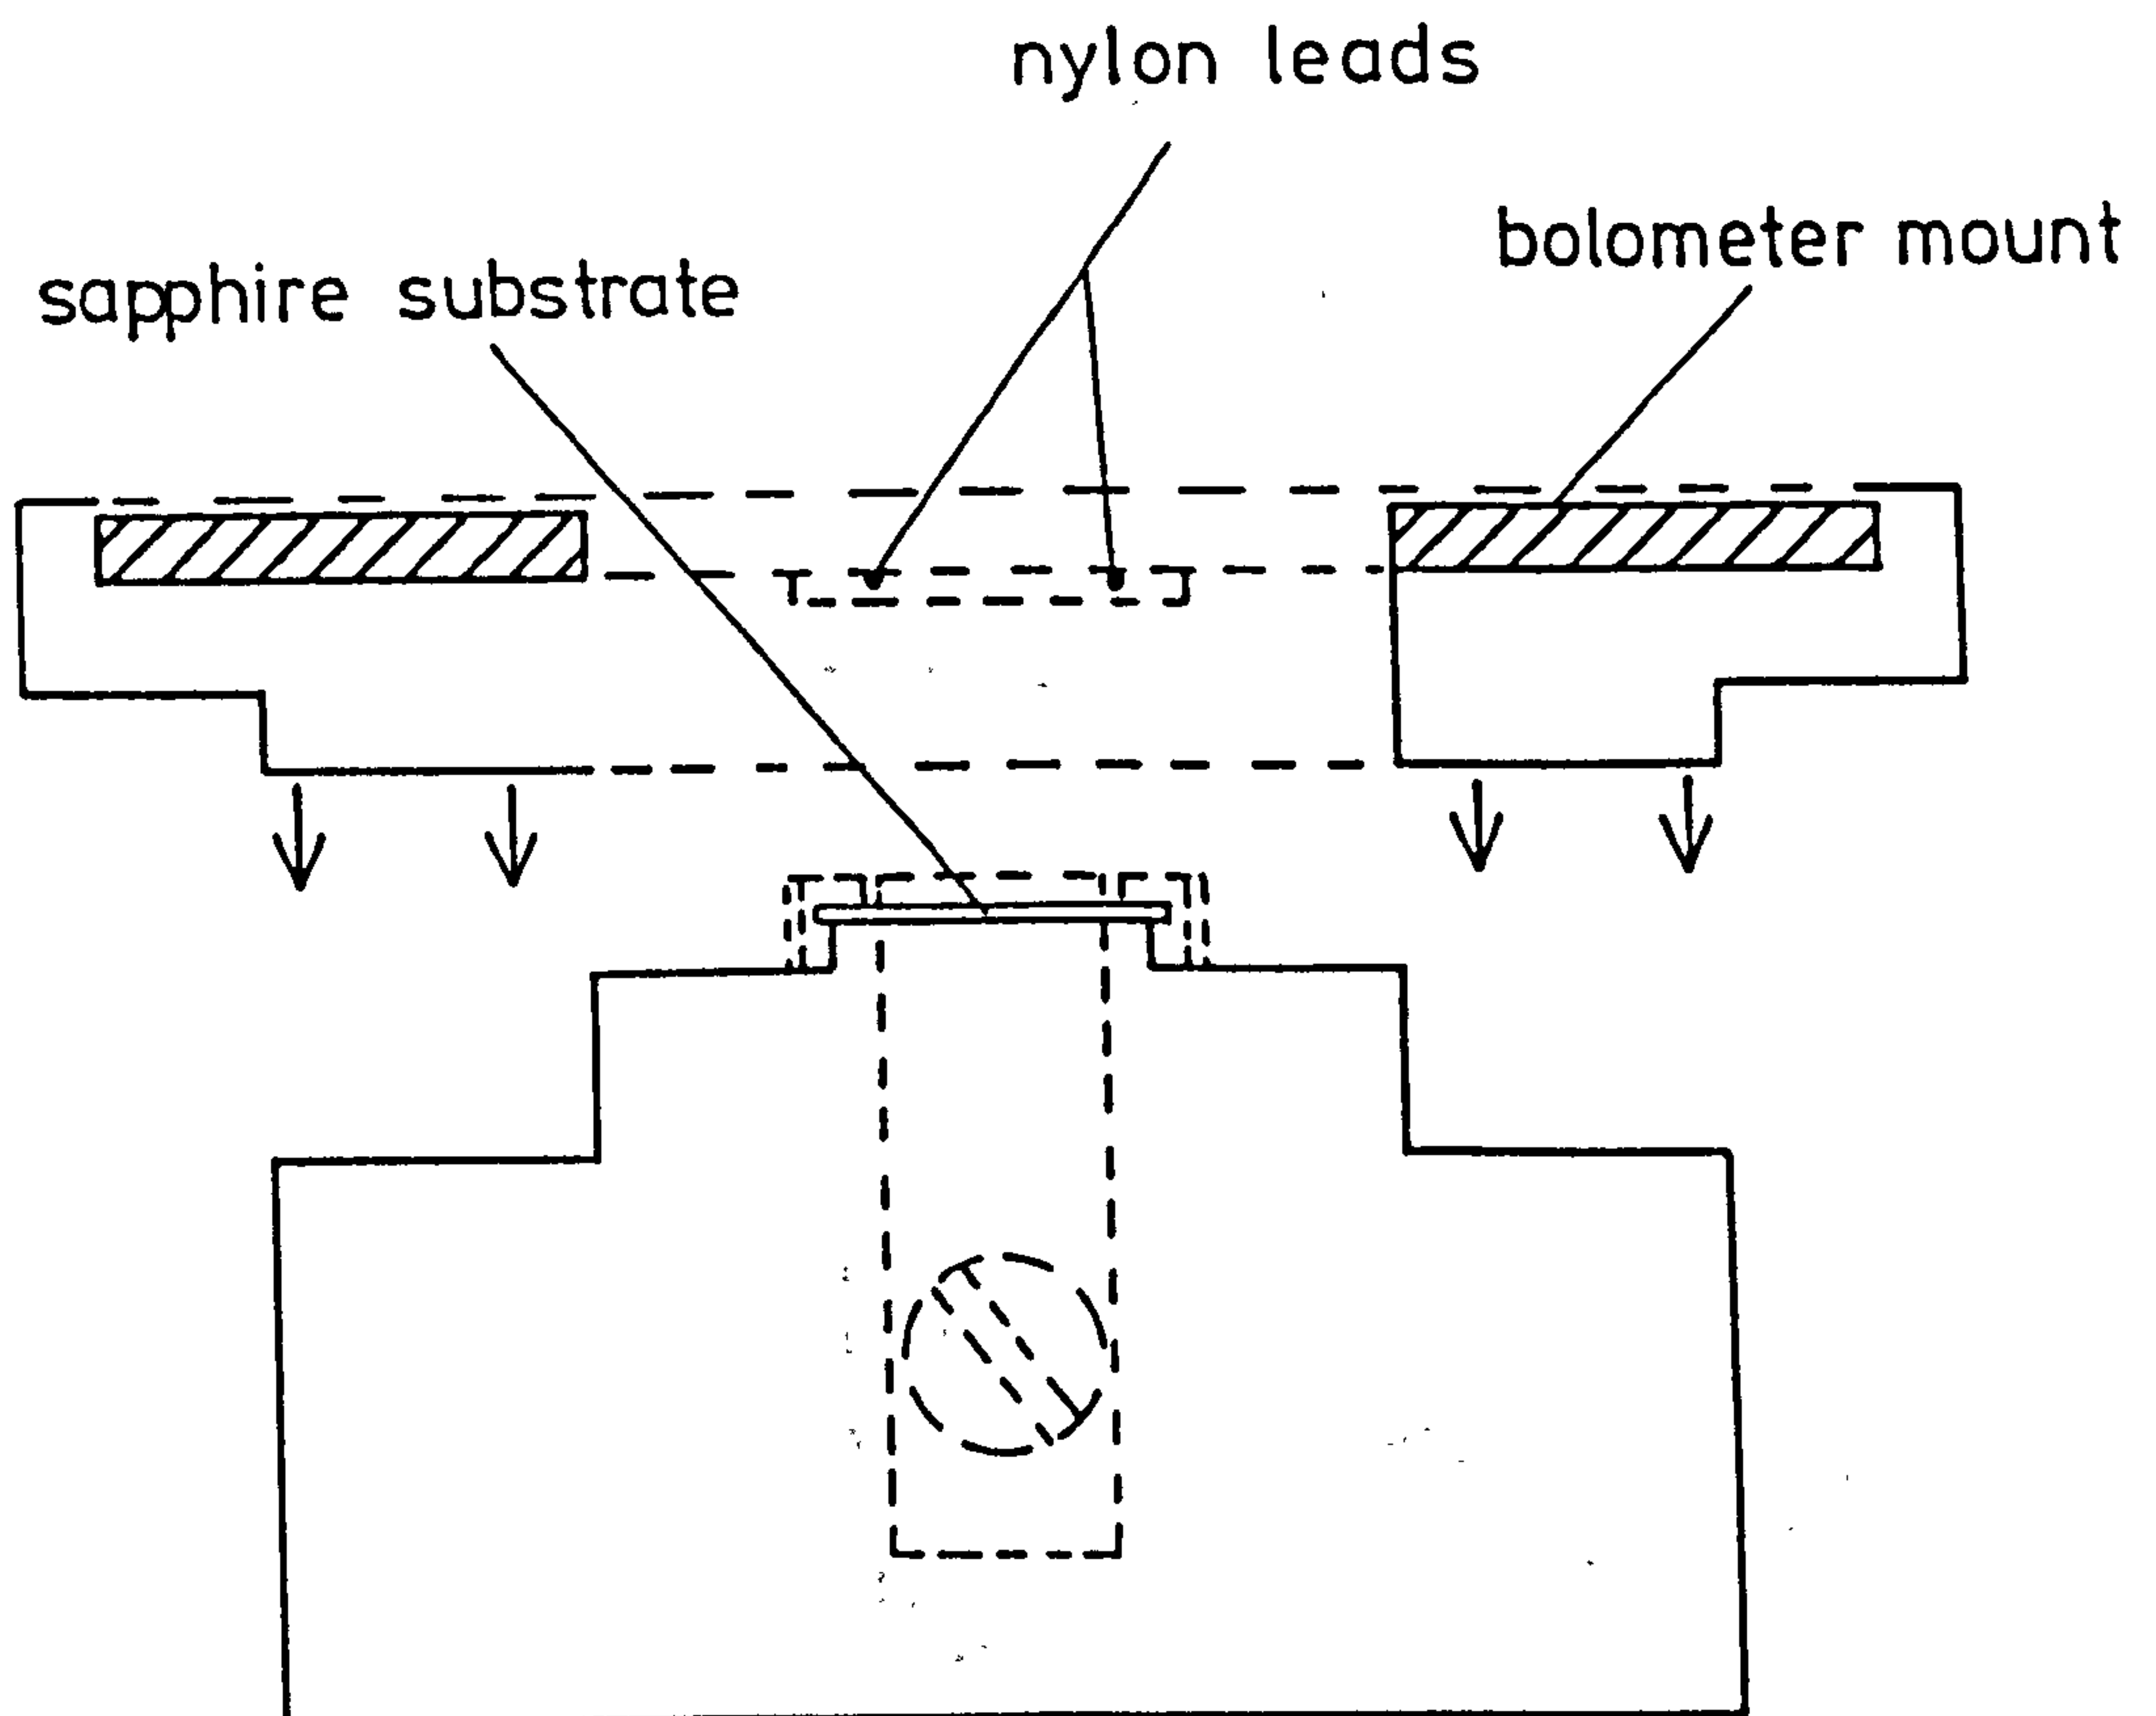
Method used to lower nylon leads onto substrate for cold-welding.
